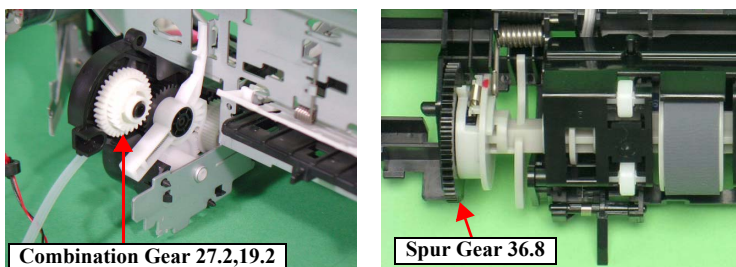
Spur Gear 36.8 and Combination Gear 27.2,19.2
